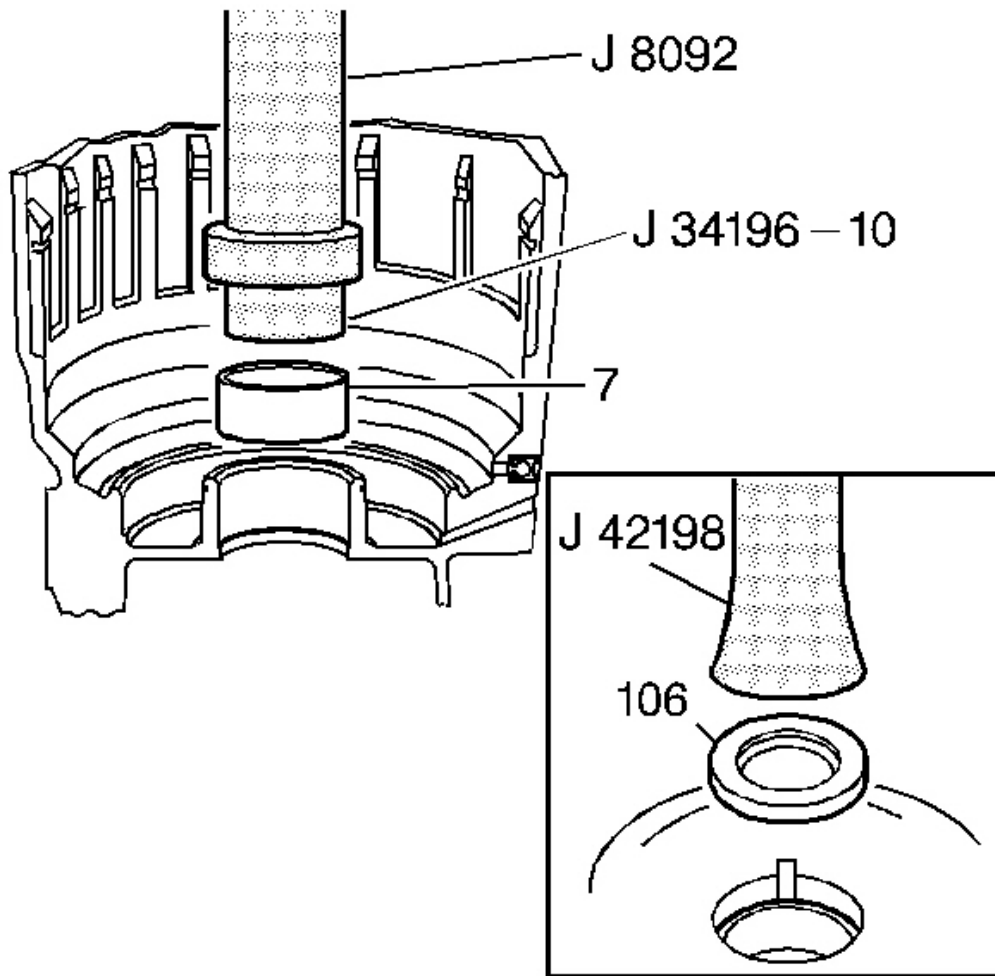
View Of Case Bushing & Case Rear Oil Seal
